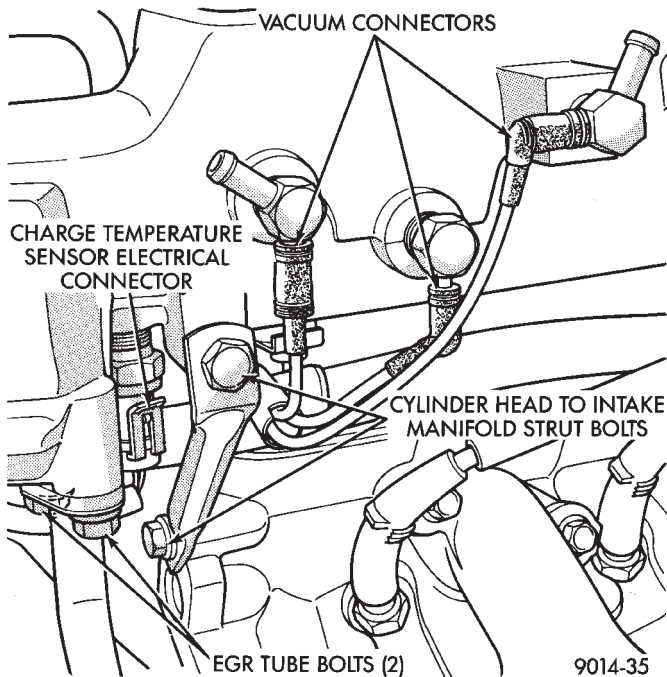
Electrical and Vacuum Connections To Intake Manifold
